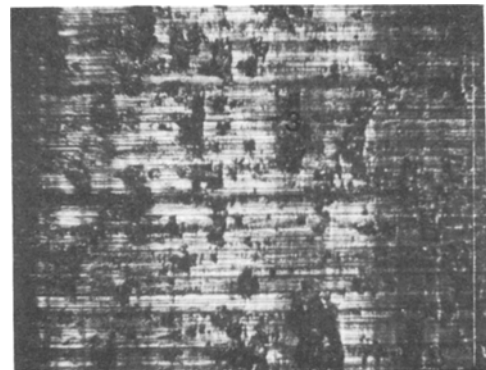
Optical micrograph of machined surface. Cutting speed 25 ft min<sup>-1</sup> (12.7 cm sec<sup>-1</sup>); wearland length 0.000 in.; rake angle 15°; dry cutting. × 25
